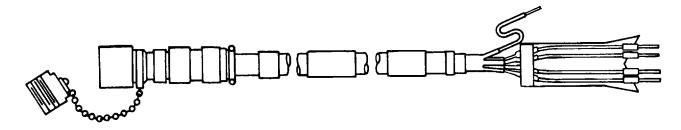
Cable Assembly CX-11282/TSC-26 and CX-11283/TSC-26, drawing number SM-C-537688.
